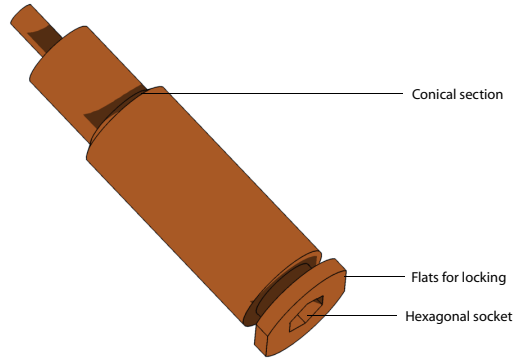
The copper “bullet” sample holder. The conical portion of the sample holder is driven into the flip stage by a screw-actuated mechanism. The bullet is manipulated by the hex socket and concentric hole. Bullets with varying final diameters have been fabricated; bullets are chosen to match the sample size, minimizing the detection of electrons emitted from materials other than the sample.
